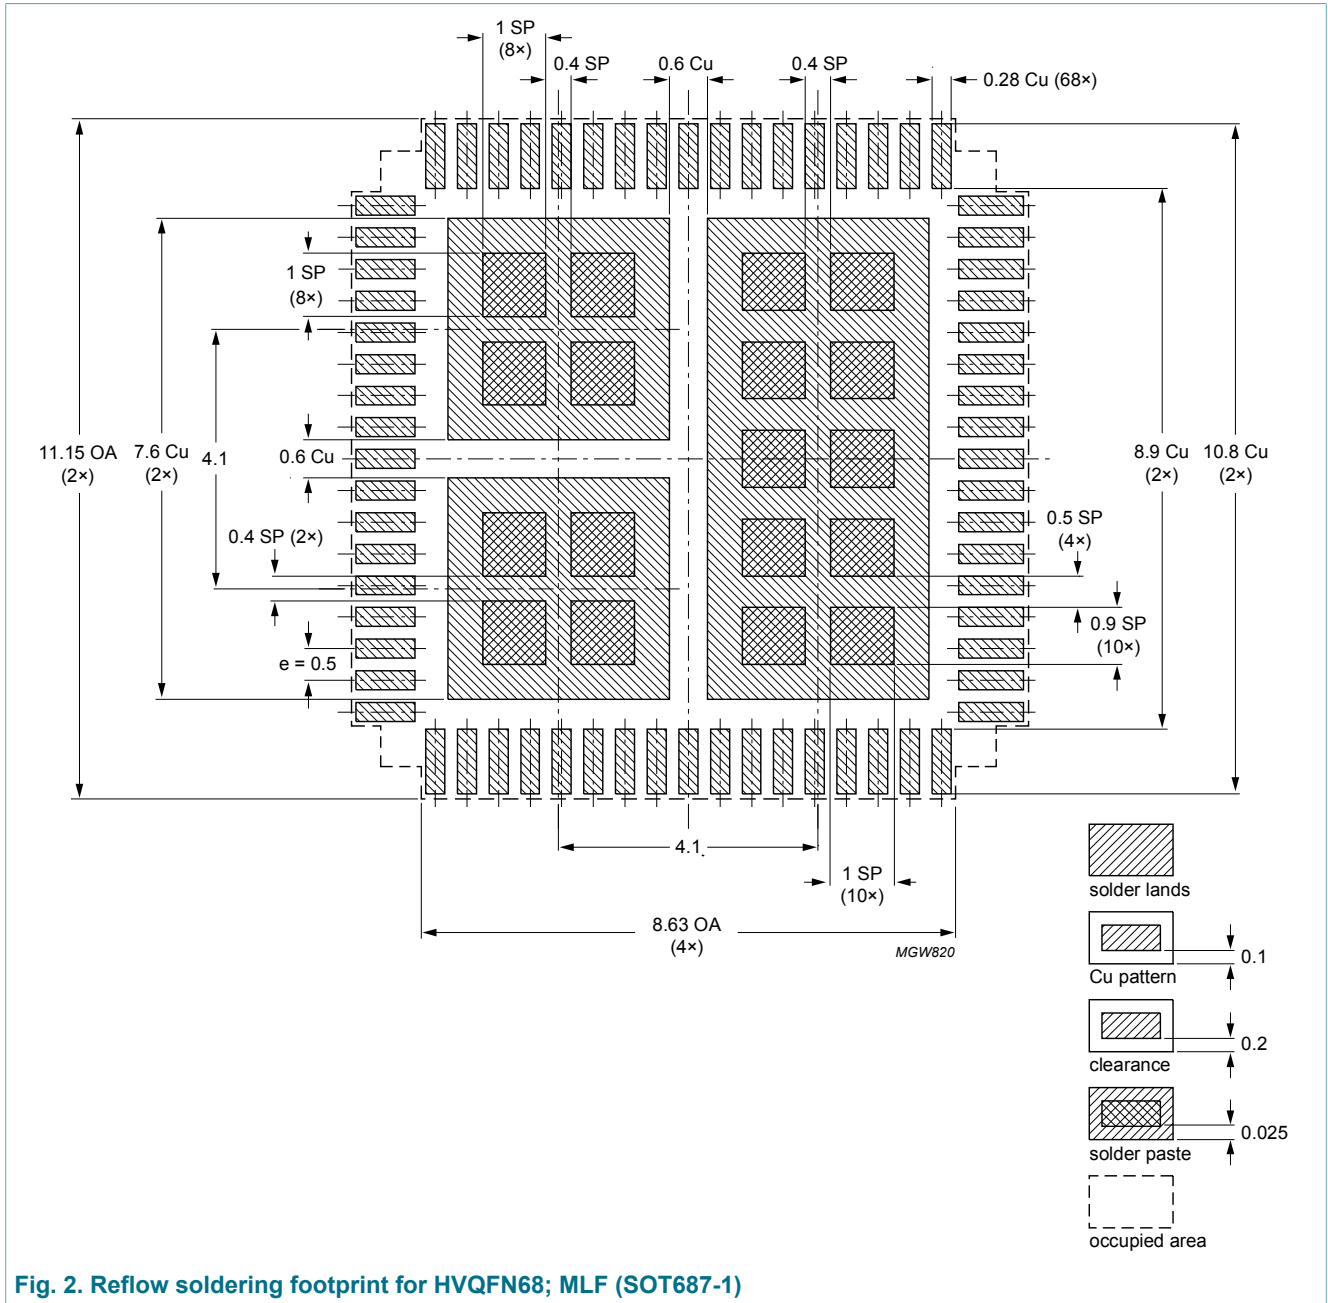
Reflow soldering footprint for HVQFN68; MLF (SOT687-1)
